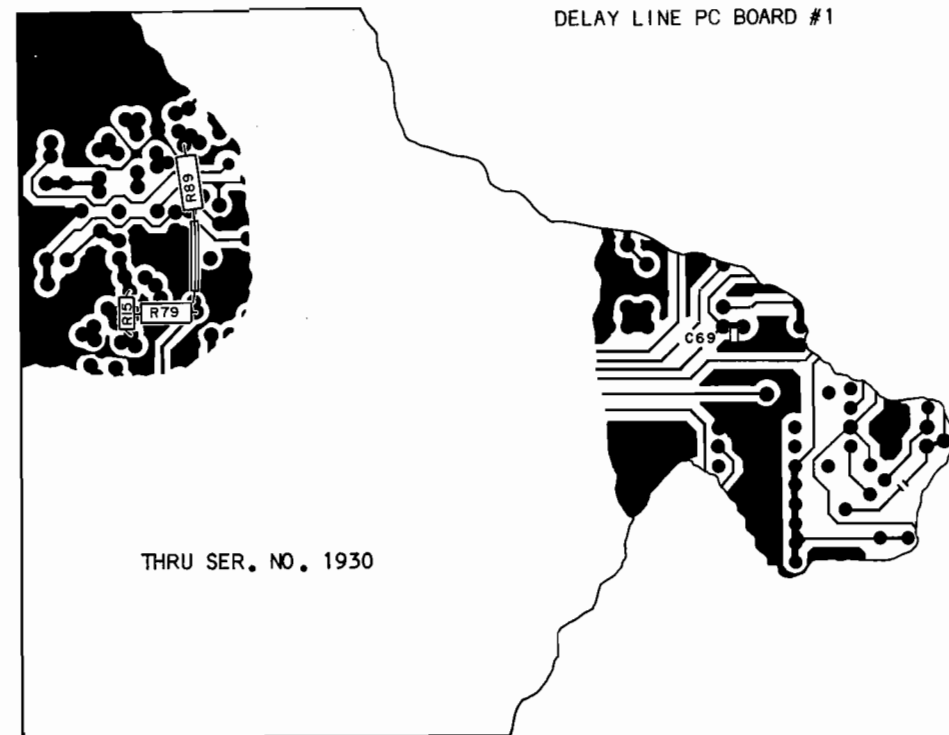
Delay Line Module (Sheet 1 of 2)
